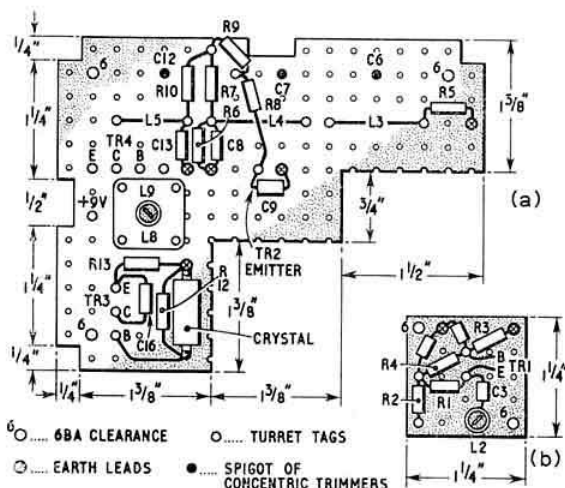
The two perforated paxolin sheets with the placing of the main components.
